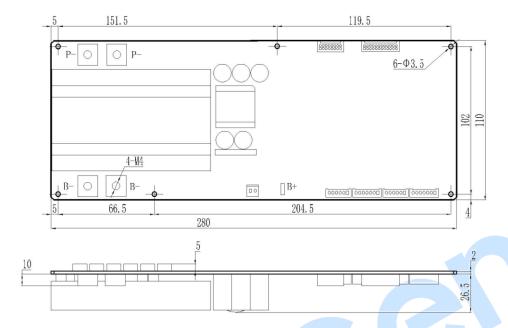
Case Dimensions of HP16S100-10 Protection Board
